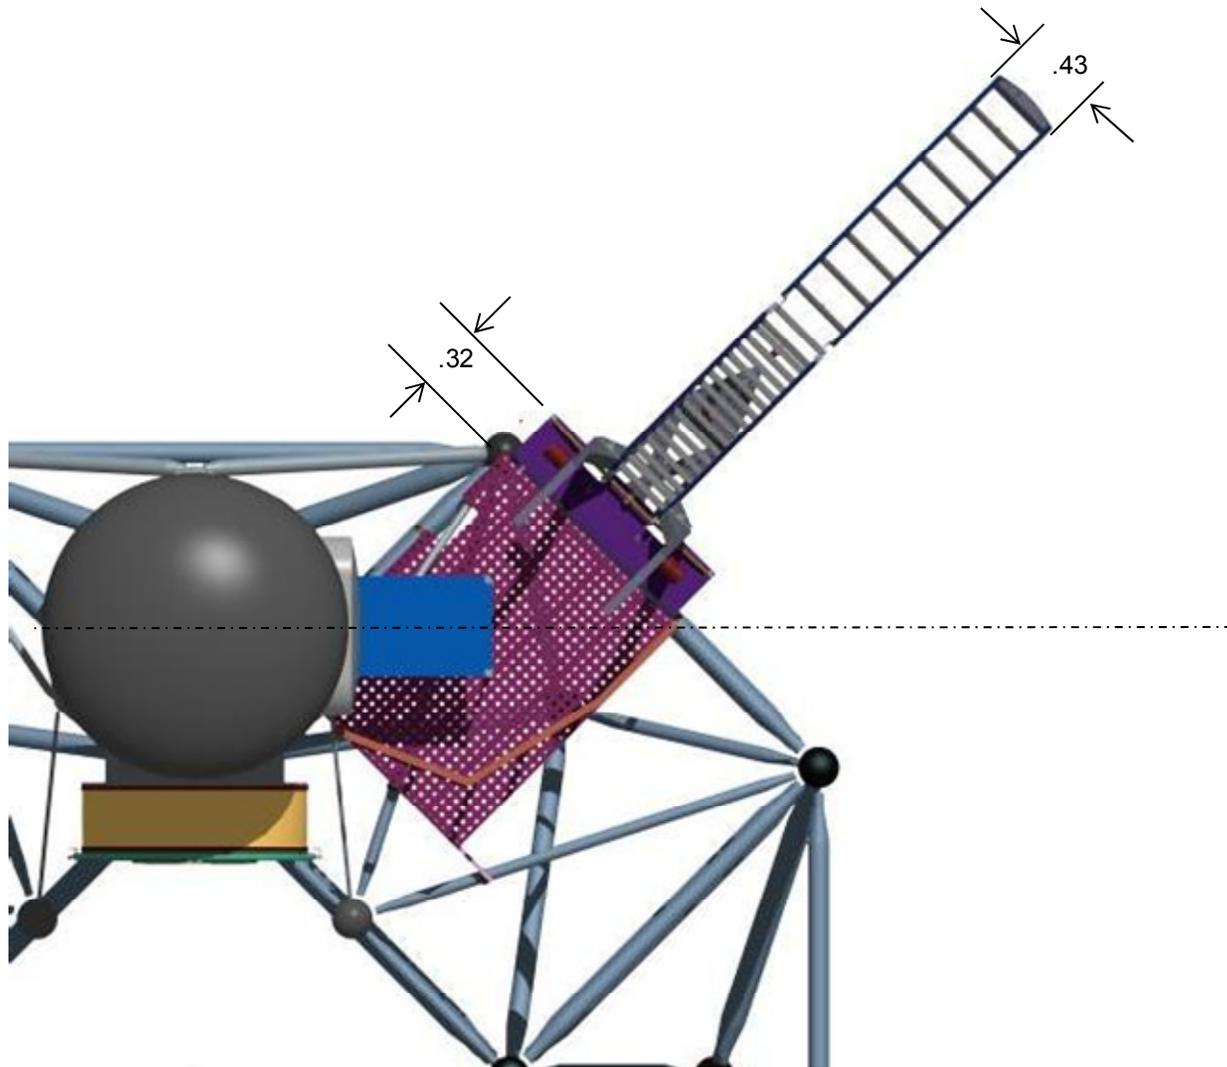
Top view of ladder dimensions used for mock-up fabrication (dimensions in meters).
